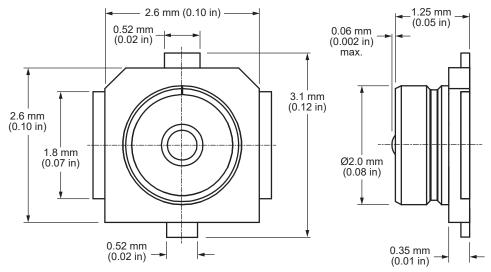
Product Dimensions for the CONMHF1-SMD Connector
